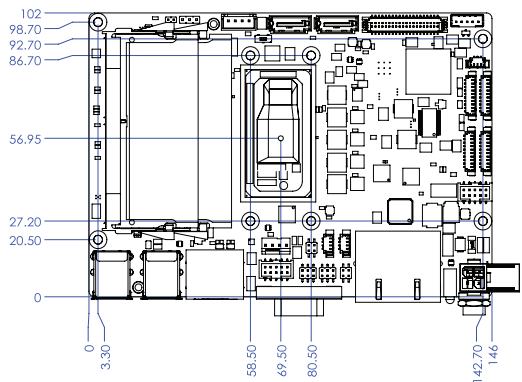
MIO-5373 Mechanical Drawing (Top Side)
